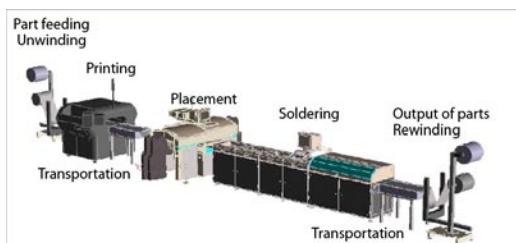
A prospective piece of equipment for reel-to-reel assembly of flexible circuits. (Source: Siemens L&A)
